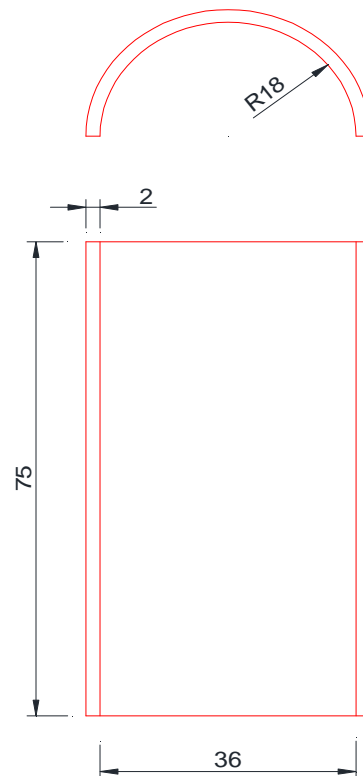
Dimensions (mm) of the semicircle shaped wind turbine blade.
